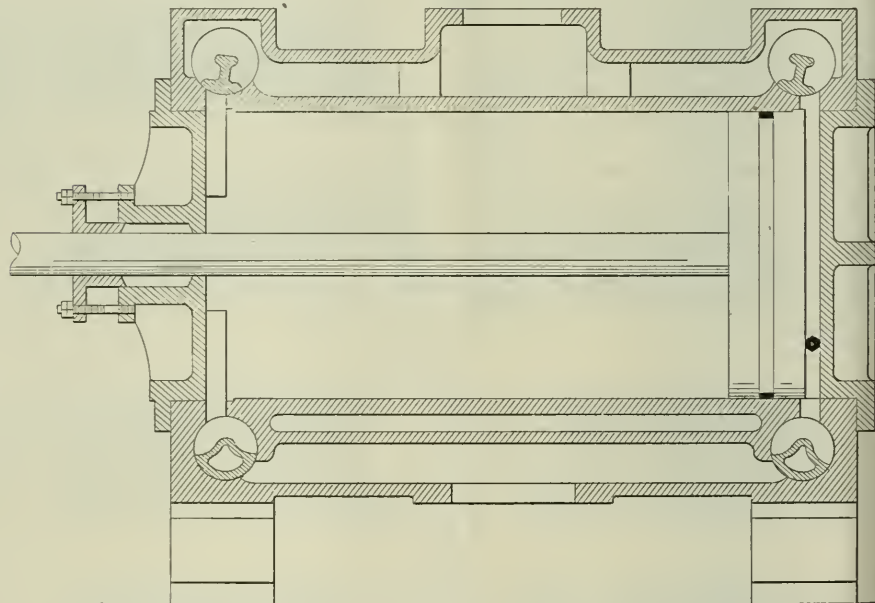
SHOWING WHERE BOLT HEAD LODGED
